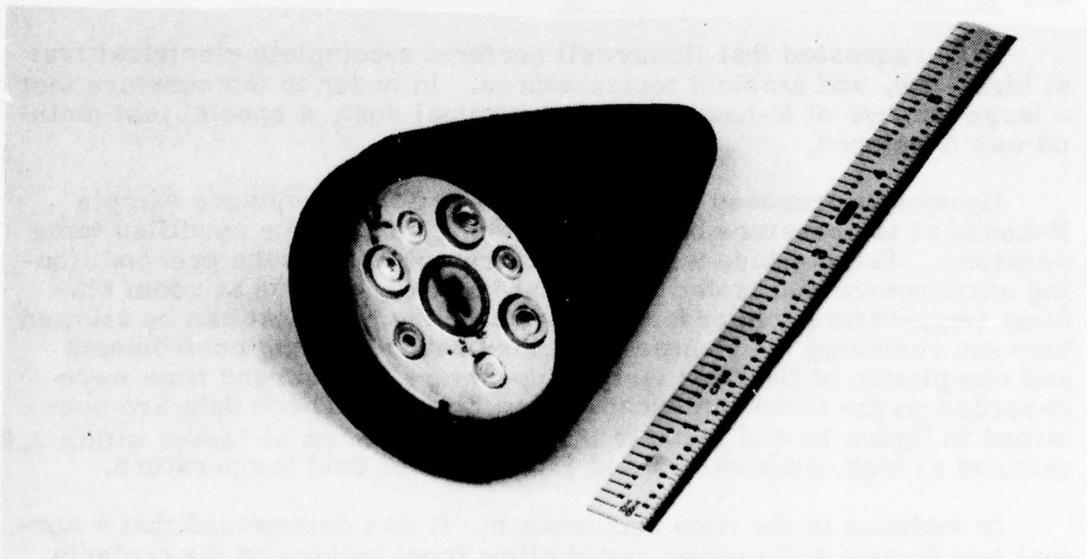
Electronics and nose cone assembly -- bottom view (part number 11711430).
